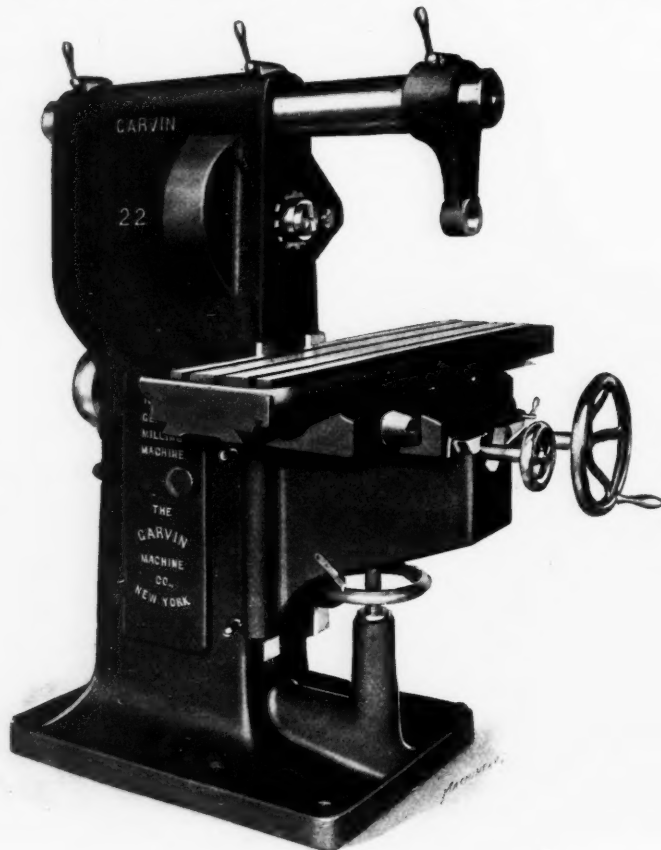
No. 22 Plain Milling Machine, built by Garvin Machine Co.
